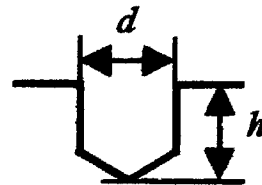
Geometry of micro drill hole drilled on the center of minimum diameter, $d = h$
